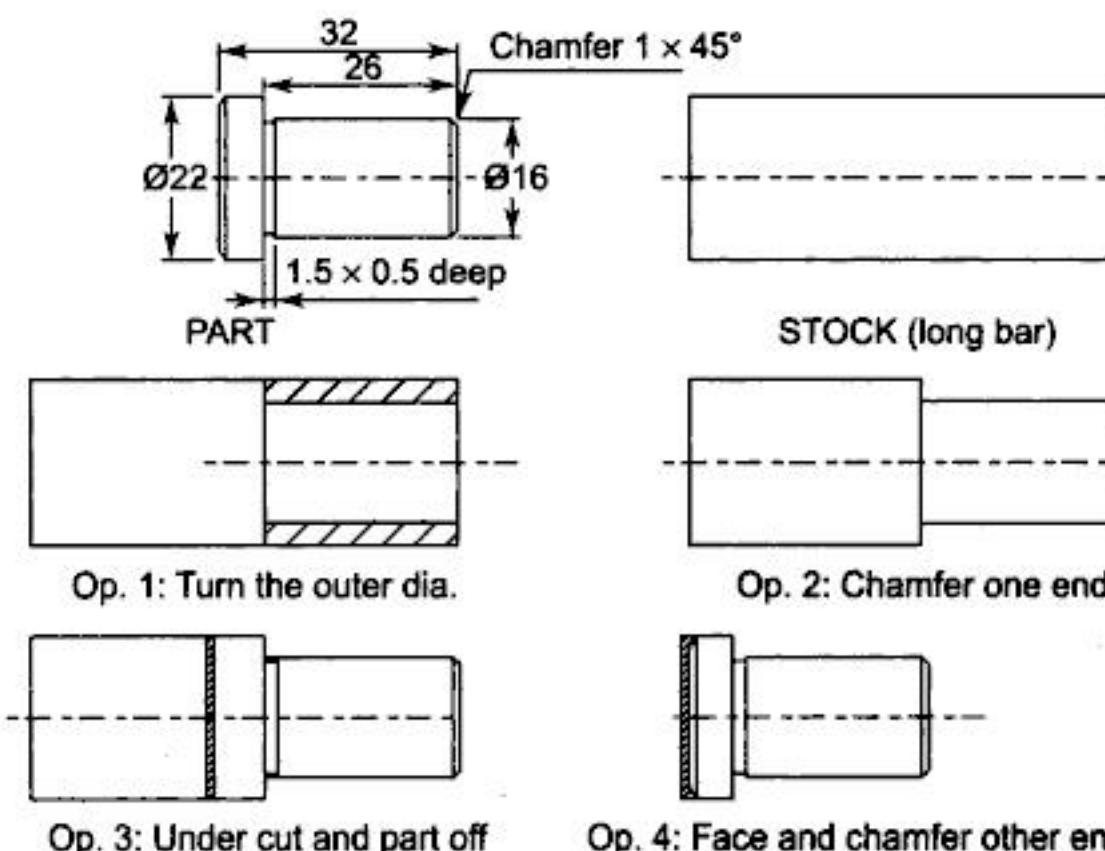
Typical process pictures for machining a pin from a cylindrical bar on a lathe involving only external features.
